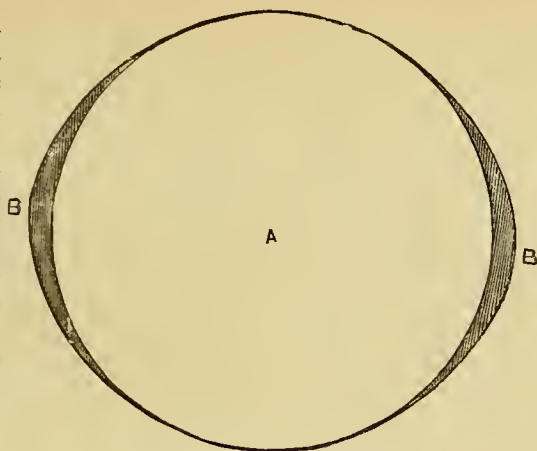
ELLIPTICAL TOOL OR POLISHER.
